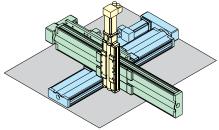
Three Axis (X-Y-Z) Cartesian Horizontal Mounting
